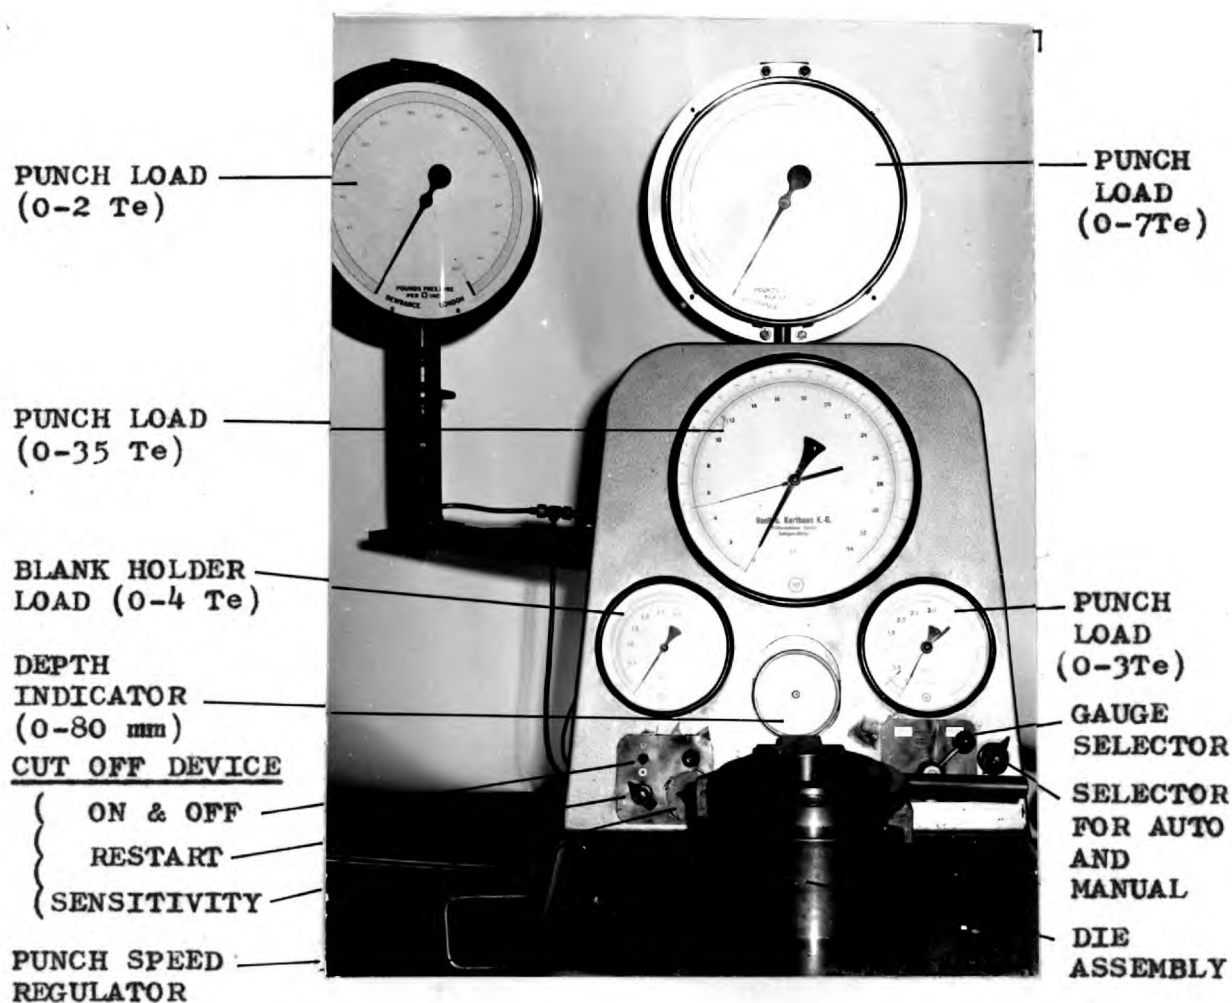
INSTRUMENT PANEL OF THE UNIVERSAL SHEET METAL TESTING MACHINE
